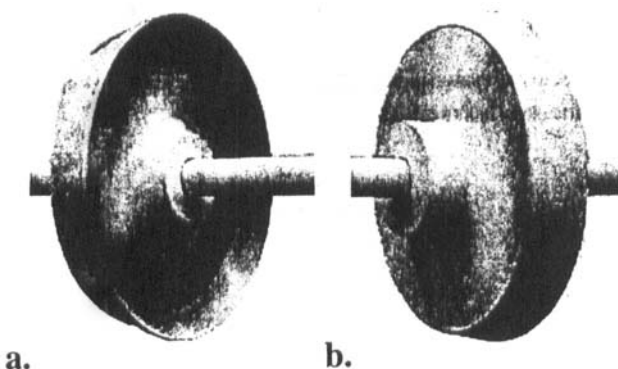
VIEW OF 'DESIGN B' DISK MOUNTED ON A STAINLESS STEEL ROD
